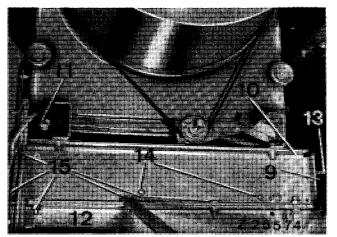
Removing Right-Hand Engine Mounting Bracket
